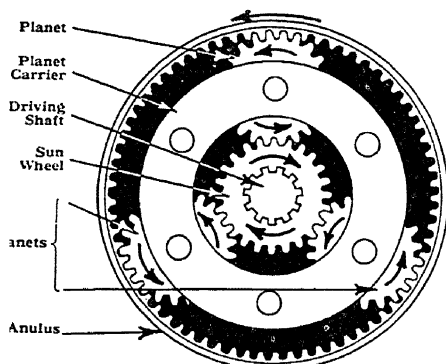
Principle of the Epicyclic Gear used on Pre-Selective Gearbox.
